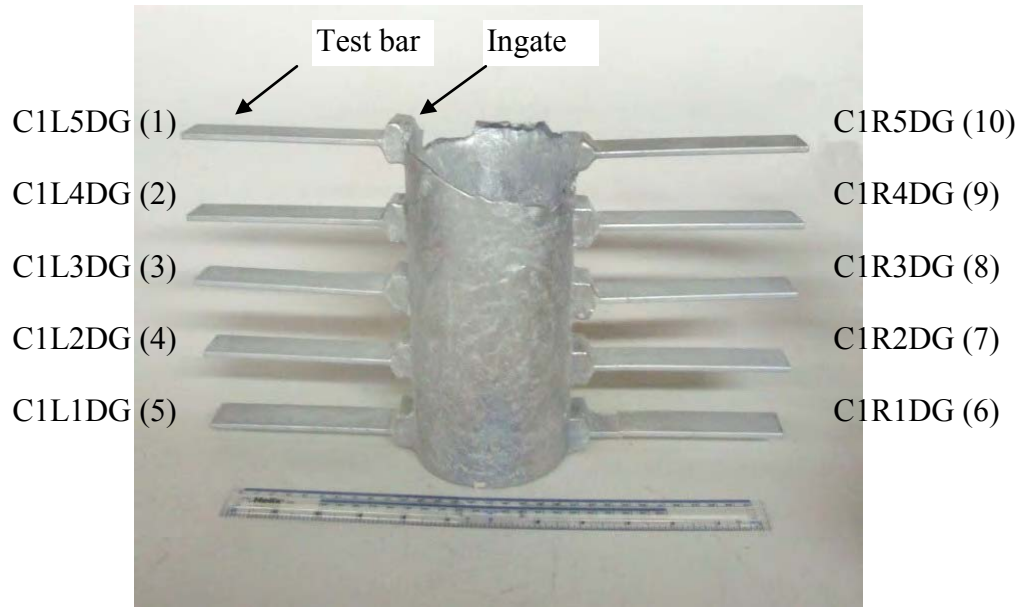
1. Experimental casting of direct gating mould design. The test bars were identified according to the code shown.
